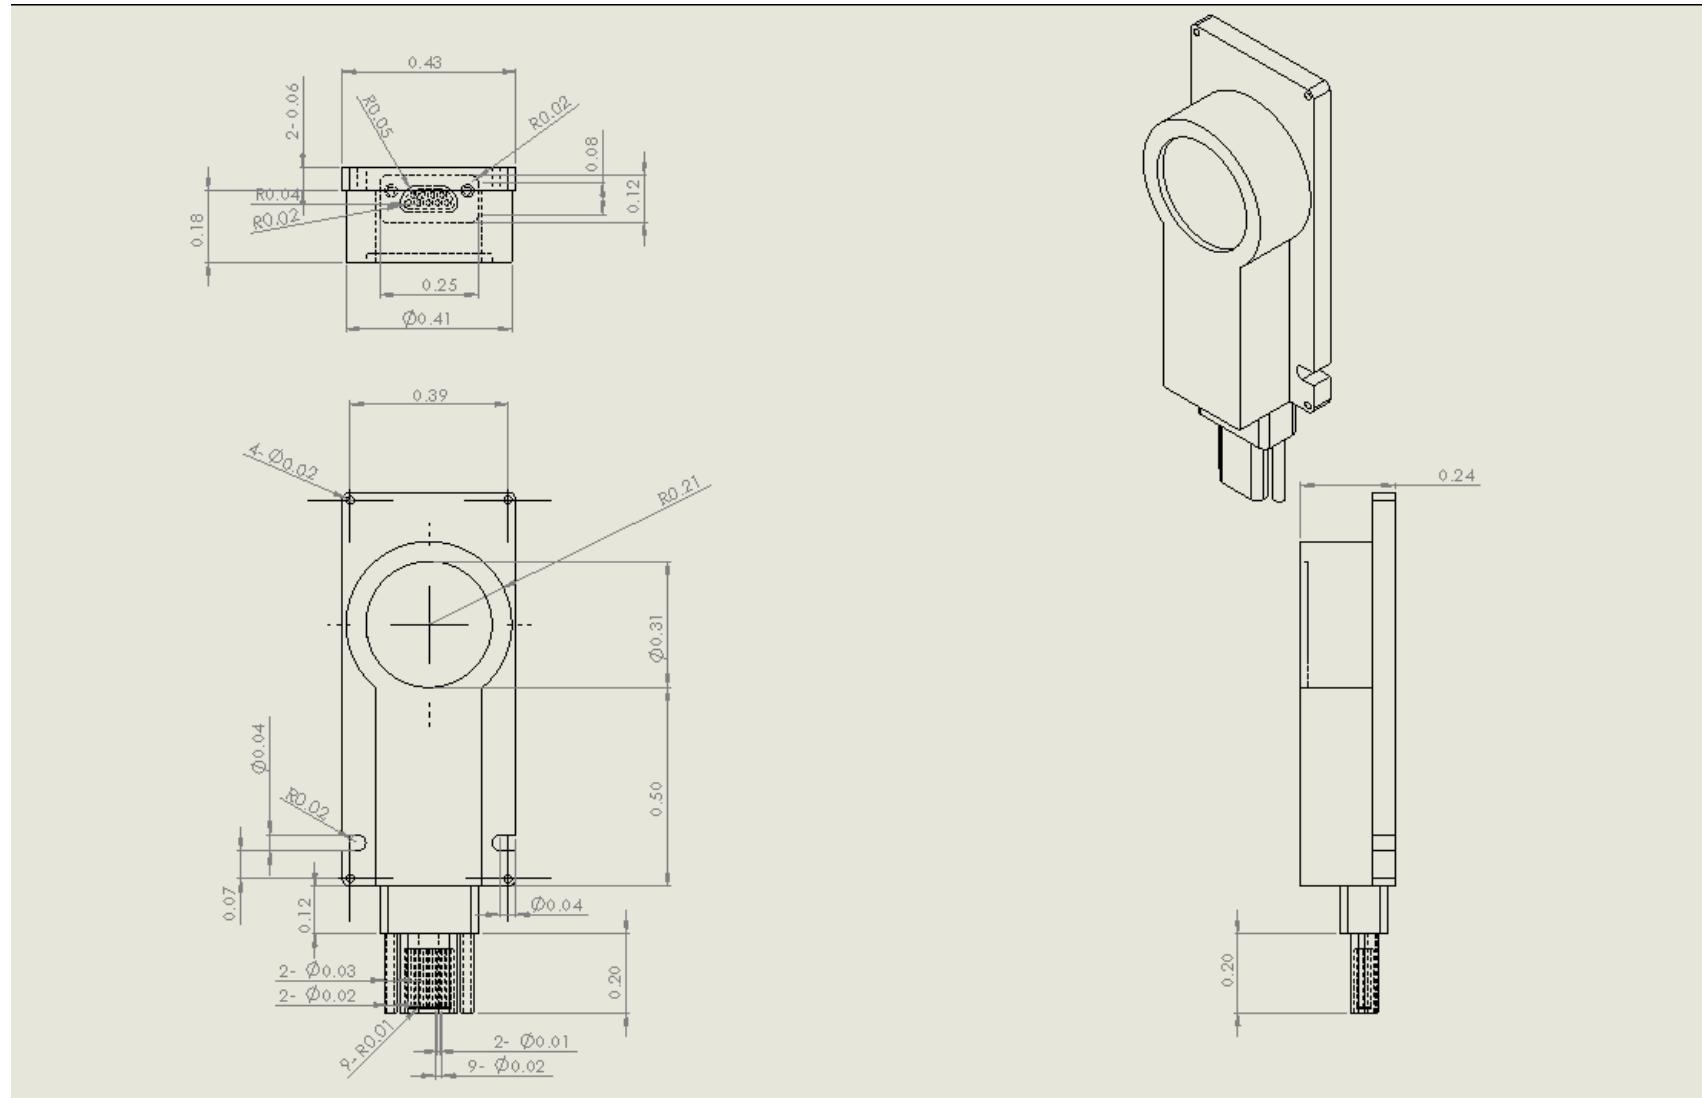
Part 1000 (NSS Fine Sun Sensor) Part Drawing
